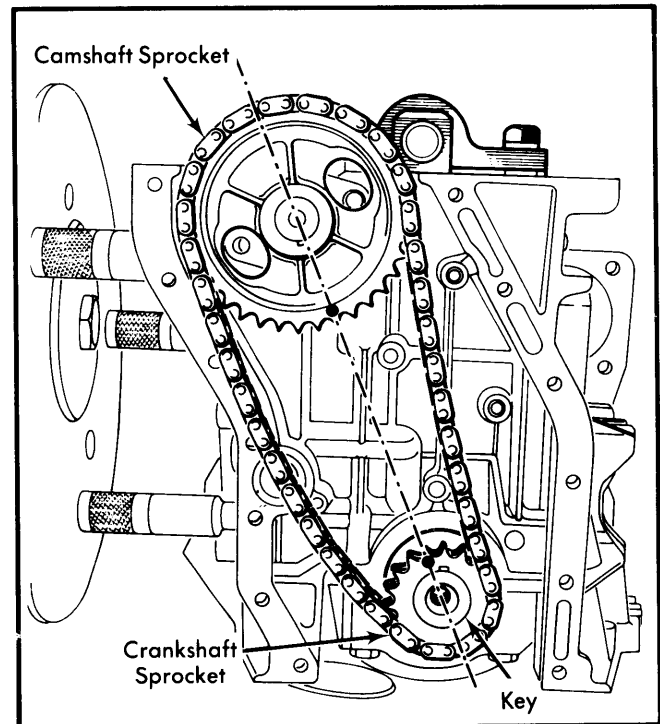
Alignment of Camshaft and Crankshaft Sprockets
